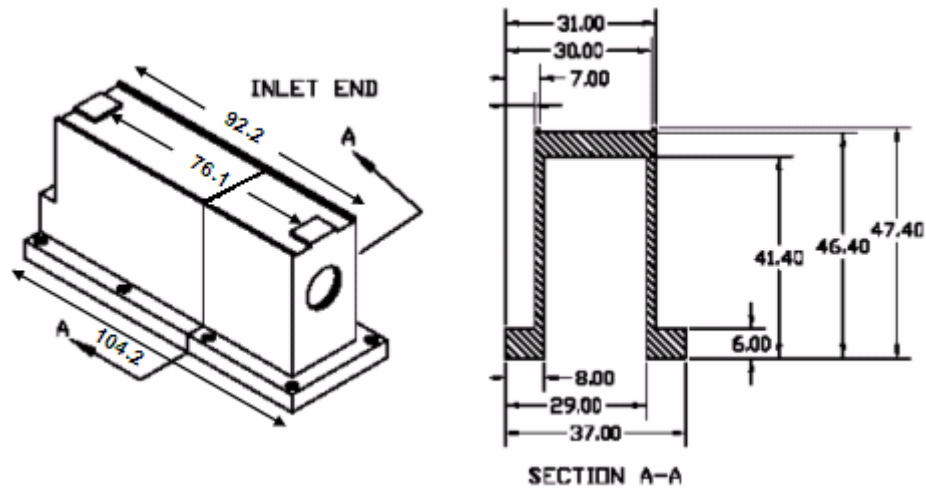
Schematic (left) and cross-sectional view (right) of outer shell (AutoCad 2006).
